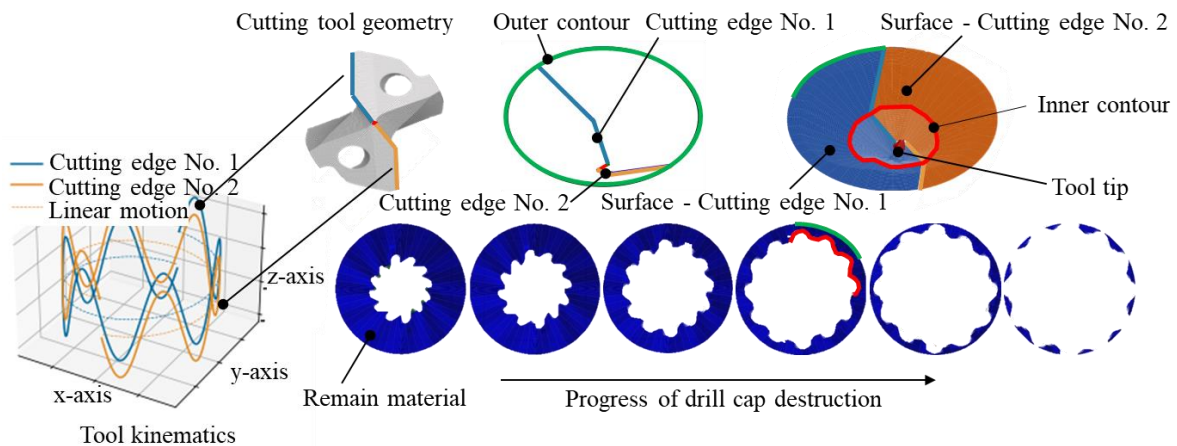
Tool kinematic simulation using VAD for drill cap destruction and its generated borehole surface
